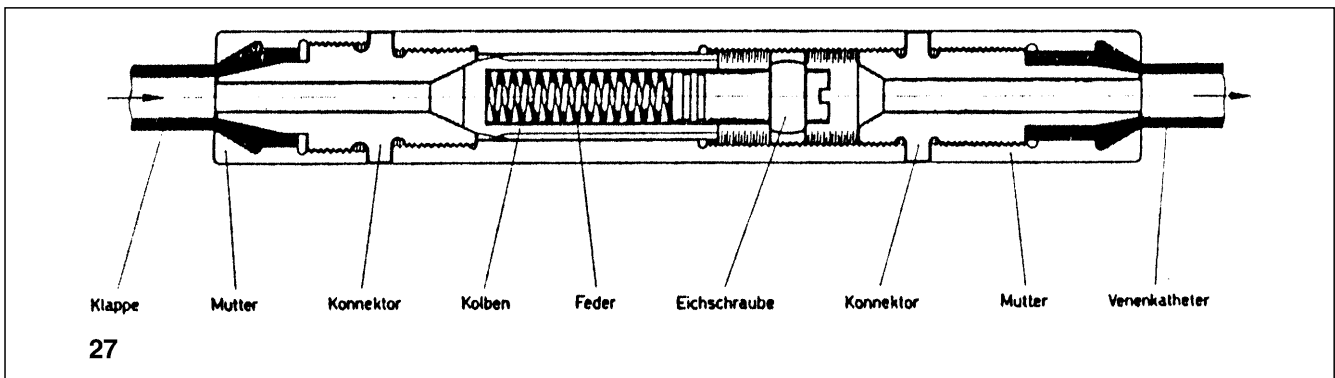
The first adjustable valve by Kuffer and Strub, 1969. Adjustment required a screwdriver [102]
